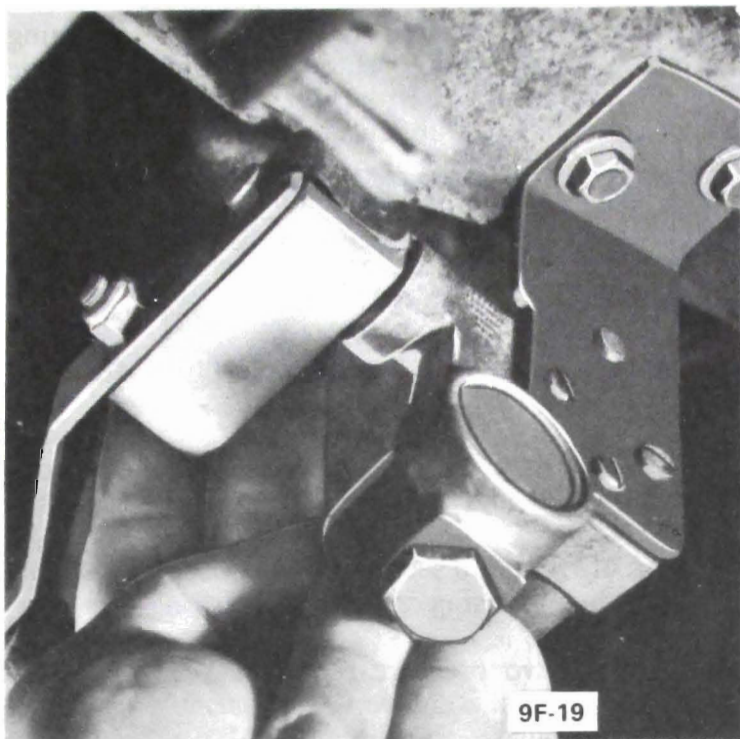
F-6 - Hold Overtravel Body in Exhaust Position
